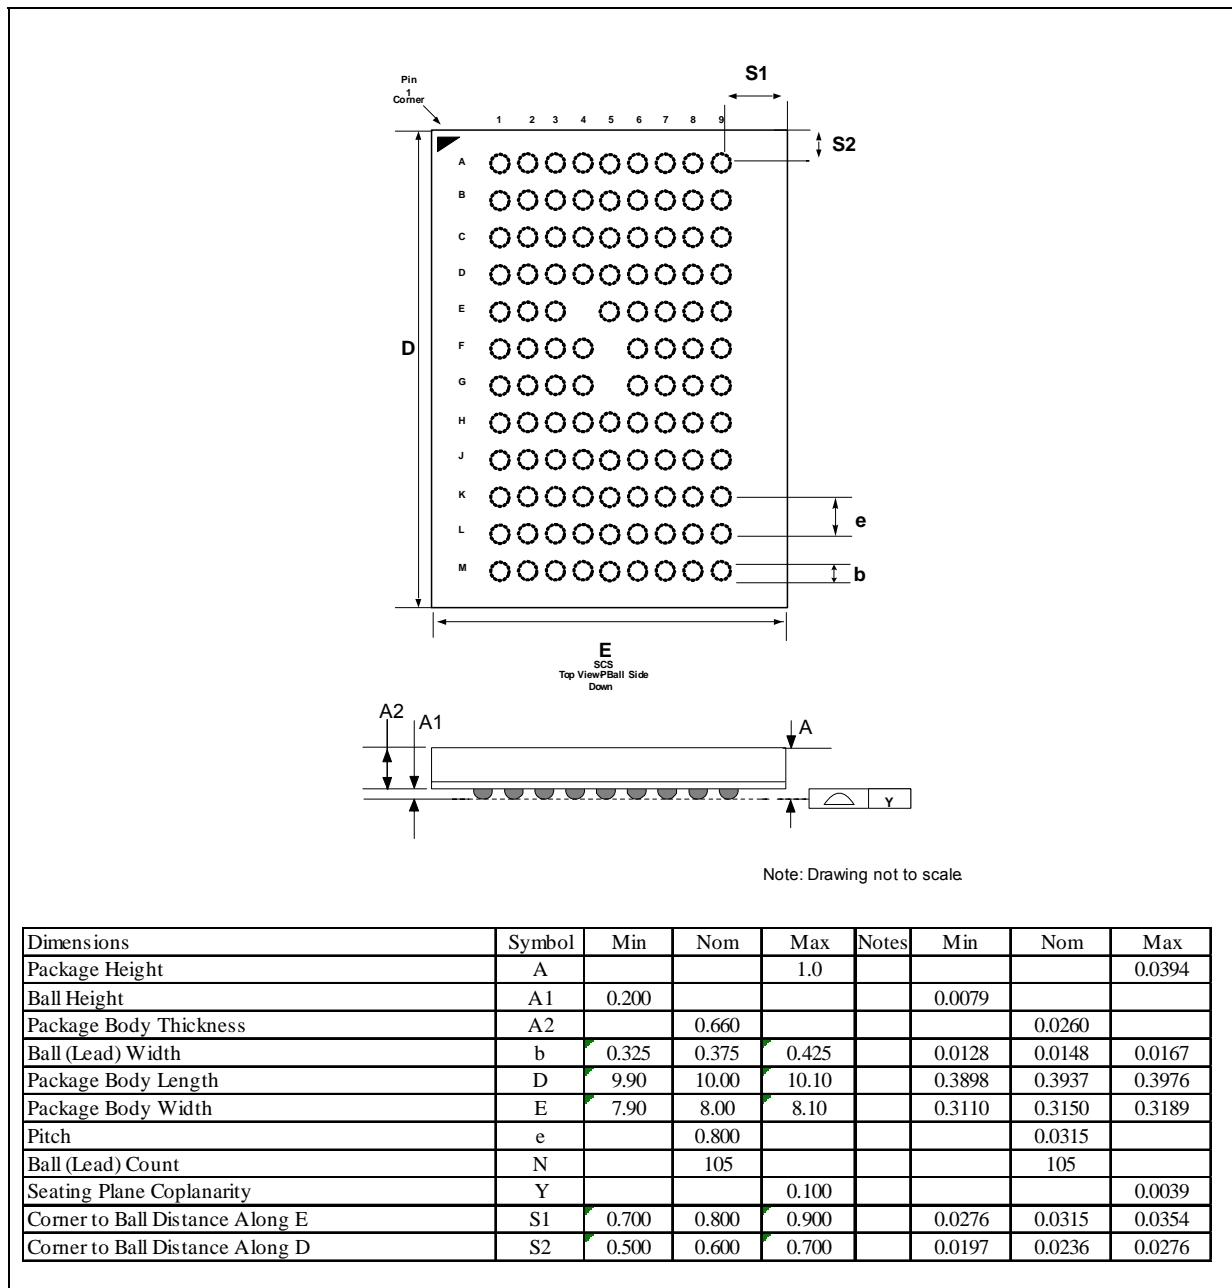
Mechanical Specifications for x16D (105-ball) package (8x10x1.4 mm)
